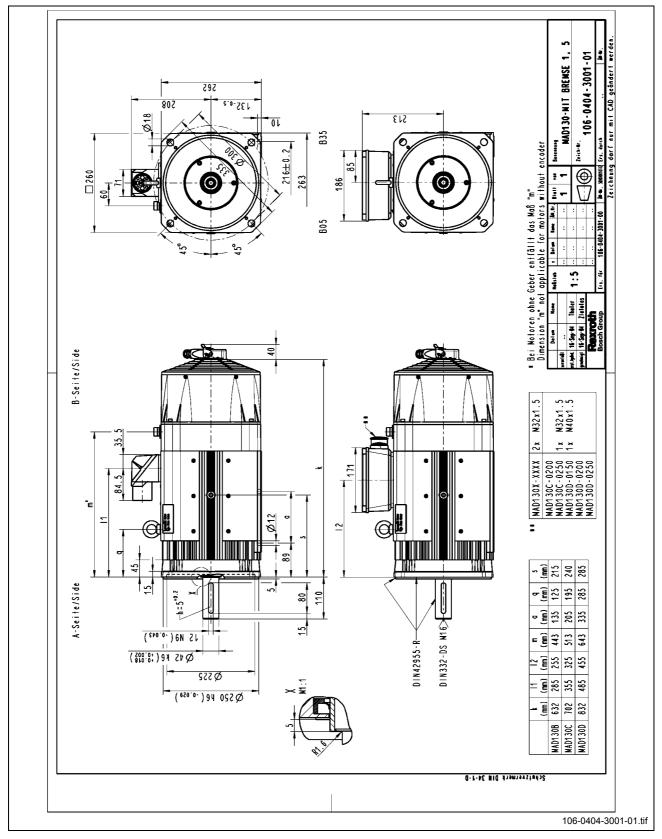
Dimension sheet for MAD130, with brakes 1 and 5
